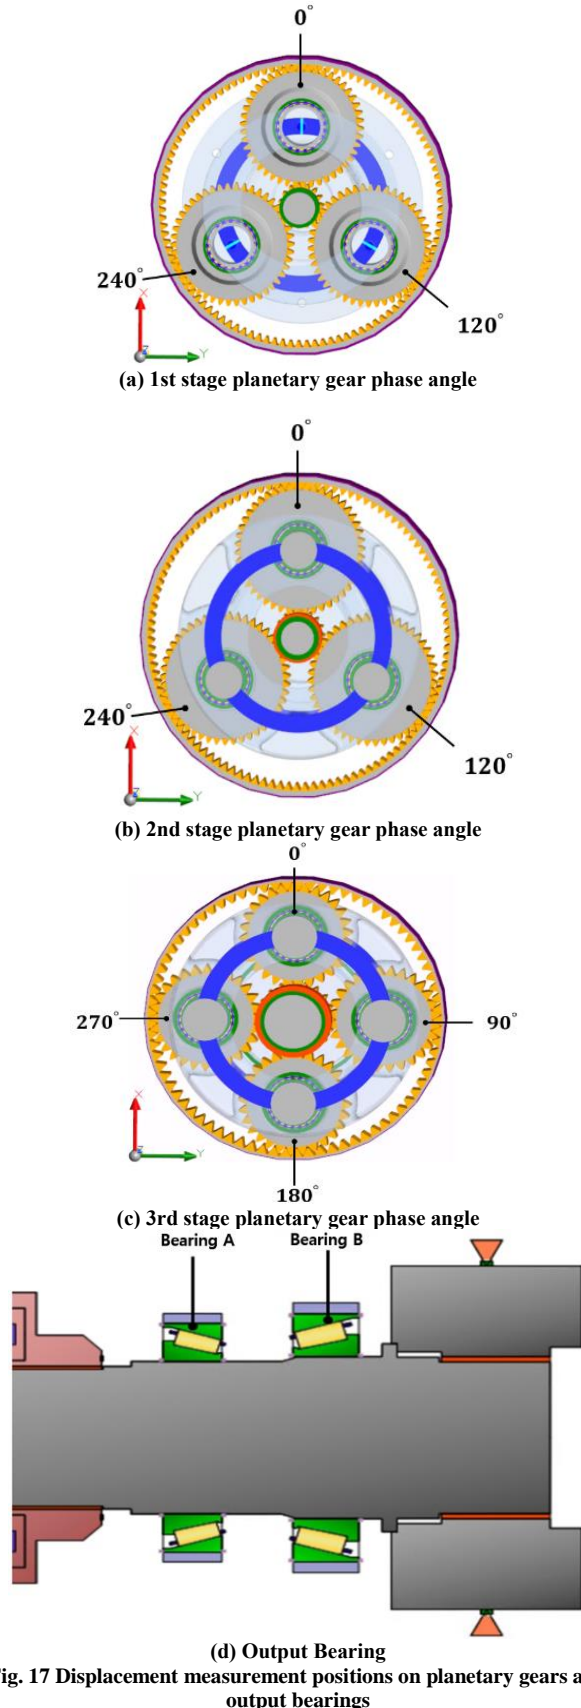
Displacement measurement positions on planetary gears and output bearings
